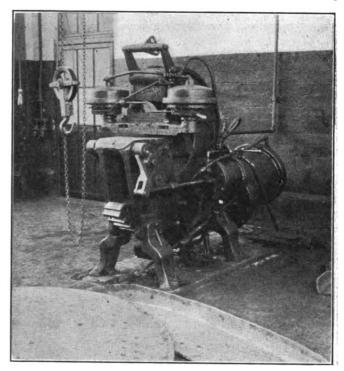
Boiler Sheets Are Flanged Cold on This McCabe Pneumatio Flanging Machine
